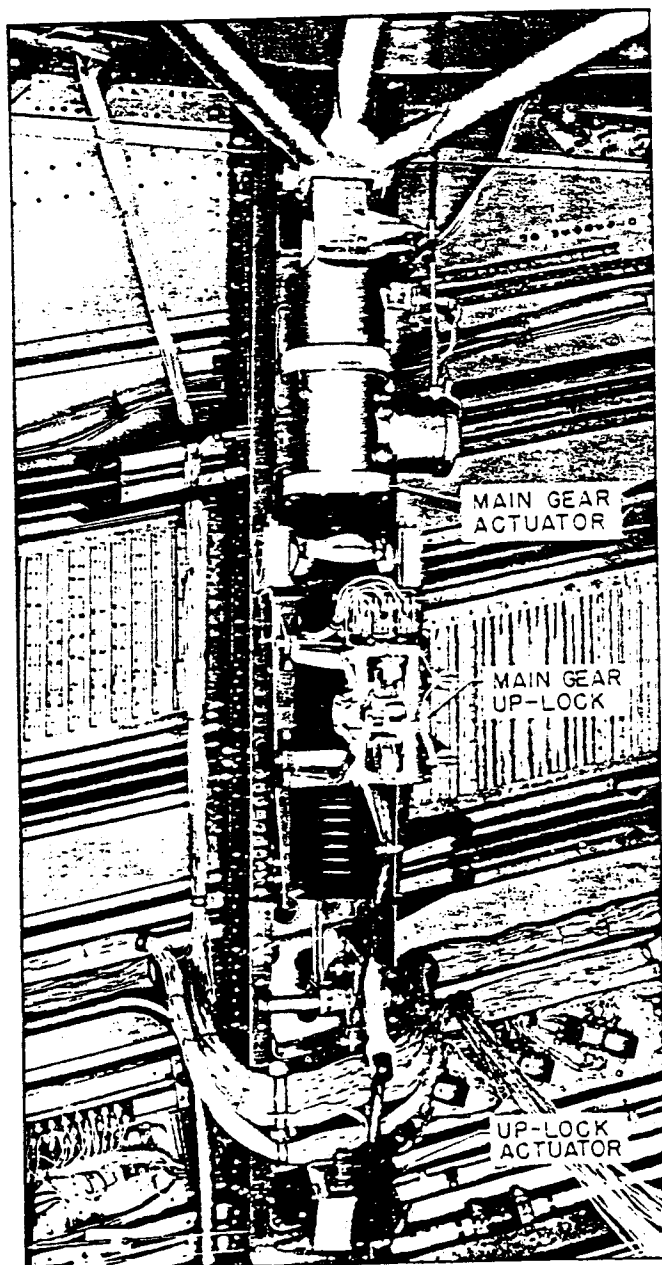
Main Landing Gear Up-Lock and Main Gear Actuator
